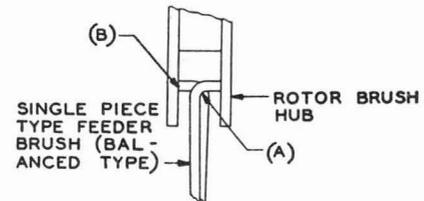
Single-piece Type (Balanced Type) Feeder Brush Tension
